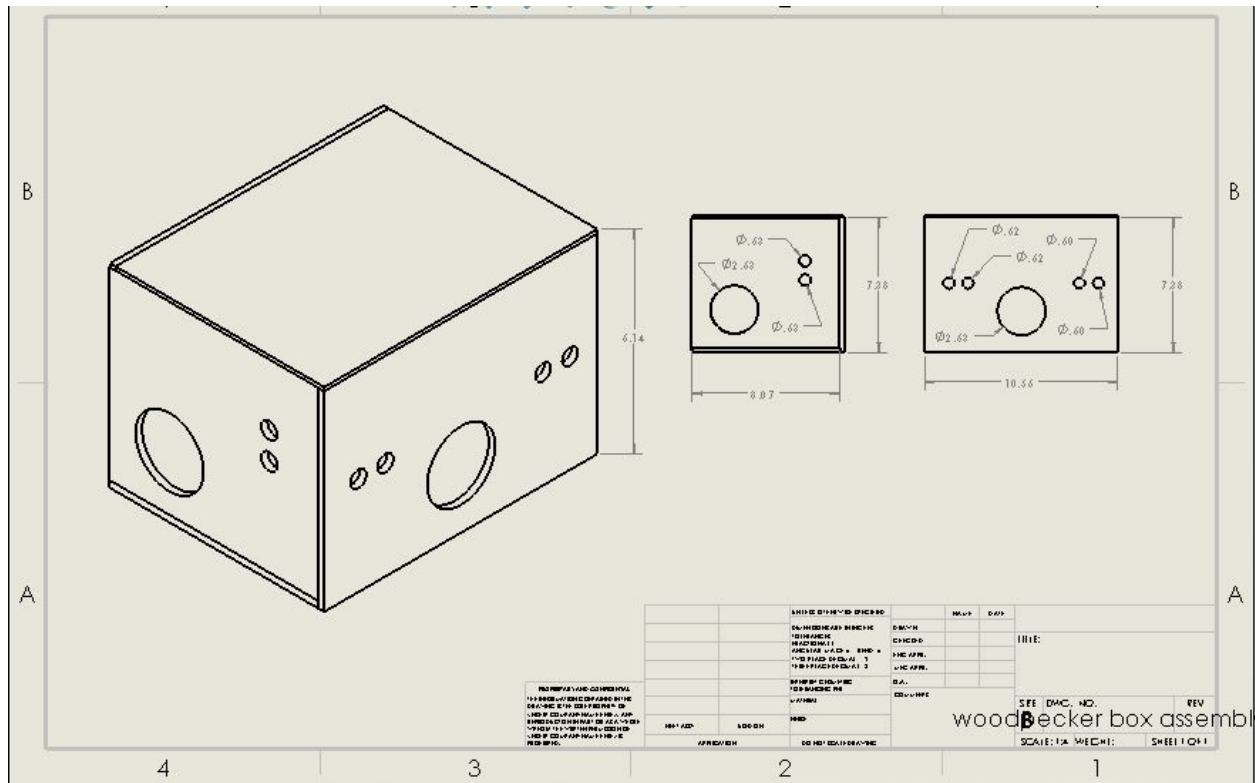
Solidworks drawing of container of device. All dimensions are listed in inches.
